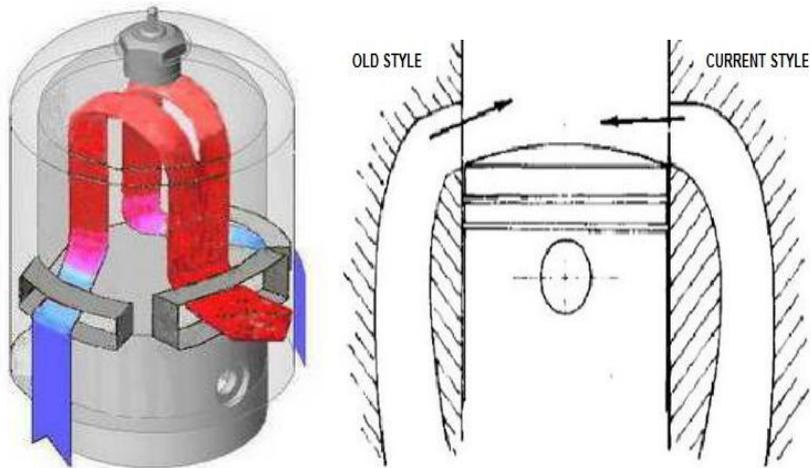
(a) Principle of reversible scavenging (loop flow) [3]; (b) Routing of transfer channels due to the development of machining technology [2].
